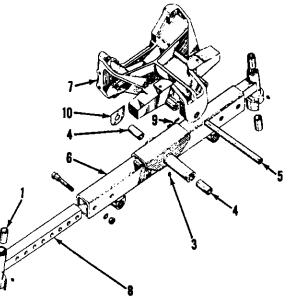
Exploded view of Series B-414, 354, 364 and 384 adjustable front axle and component parts. Knuckle bushings
